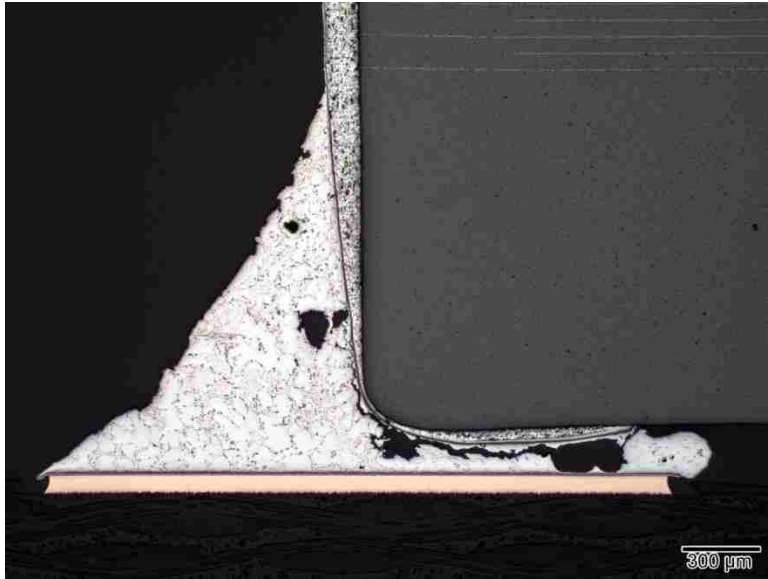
Cross-sectioned “large” capacitor with cracked solder joint.
